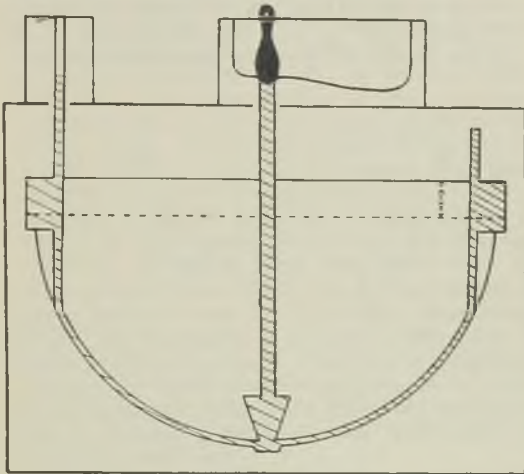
SECTION THROUGH THE MOULD OF THE CASTING SHOWN IN FIG. 16.
